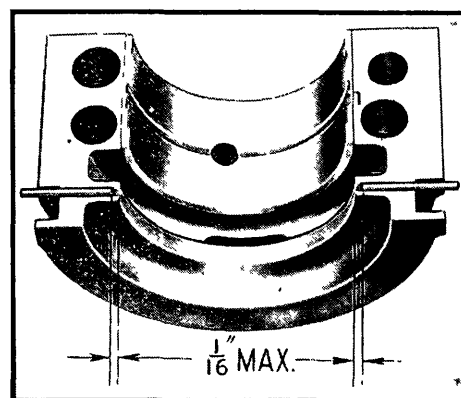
Installing neoprene seals in bearing cap groove, 1949-52
